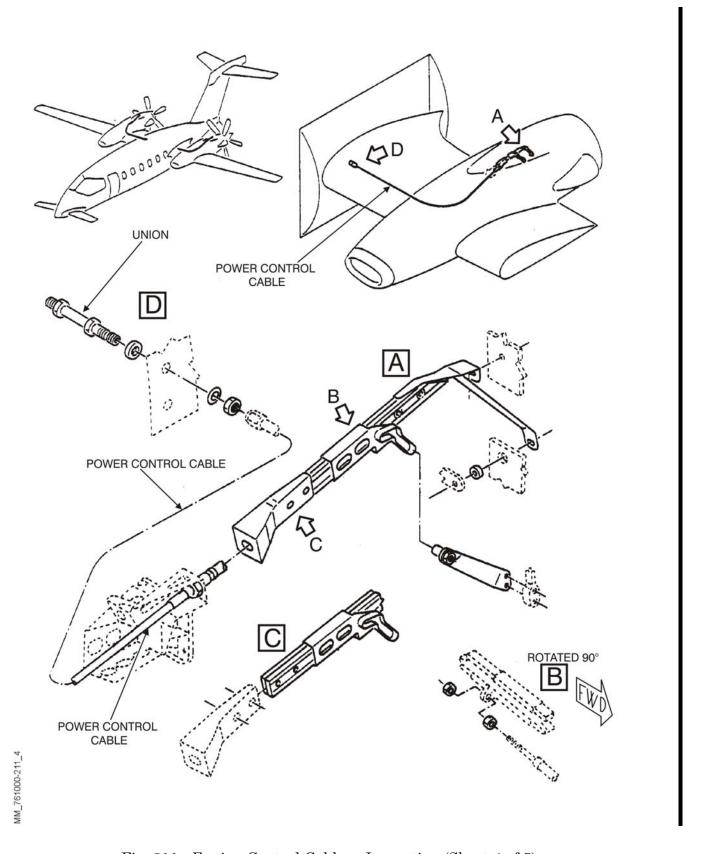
Engine Control Cables - Inspection (Sheet 4 of 5)
